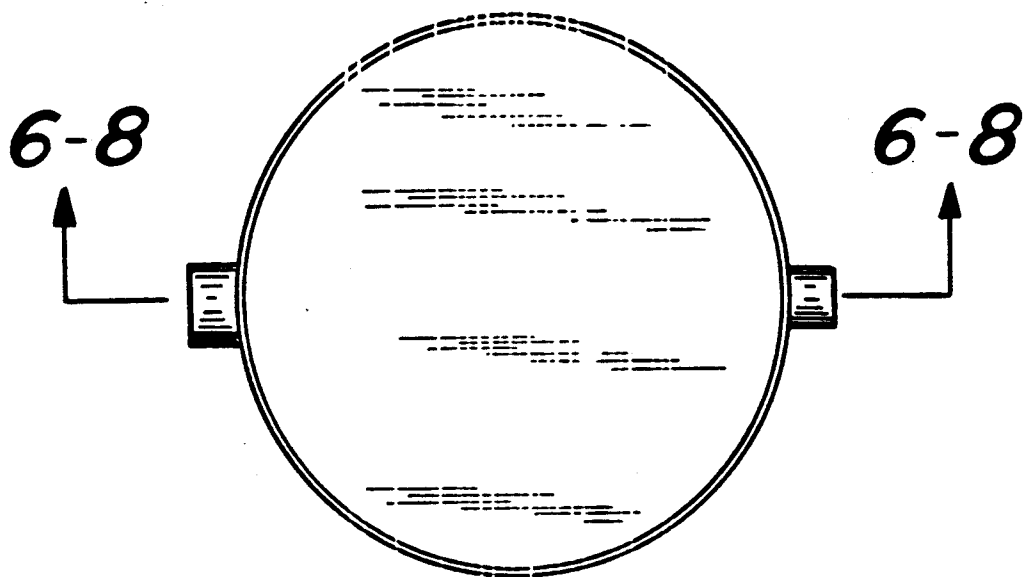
is a bottom view of the disclosed vacuum filter flask;
